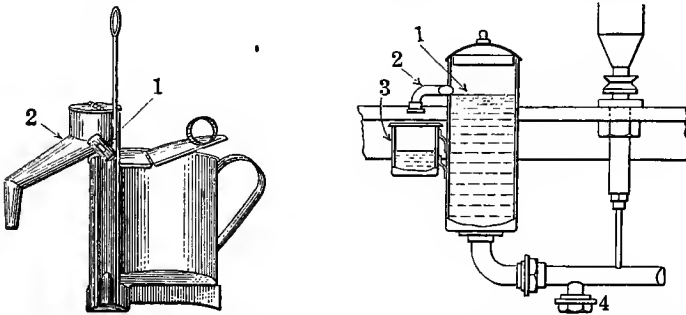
Ring spindle oil can. FIG. 128.—Ring spindle oiling arrangement.
